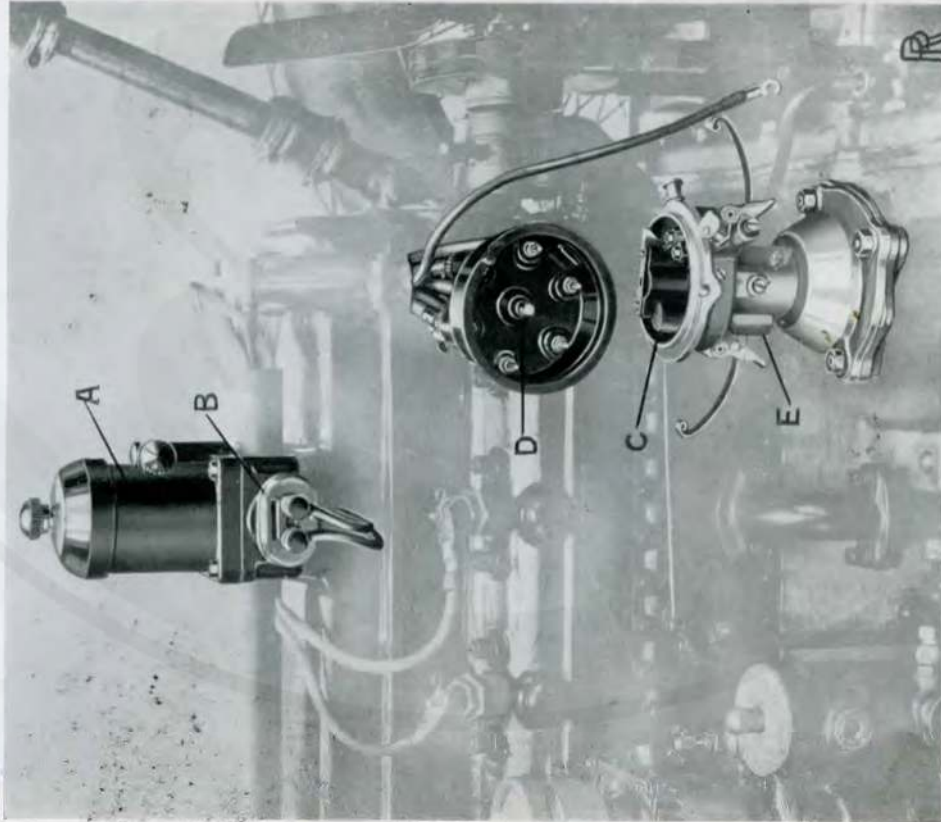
IGNITION COIL AND DISTRIBUTOR.
